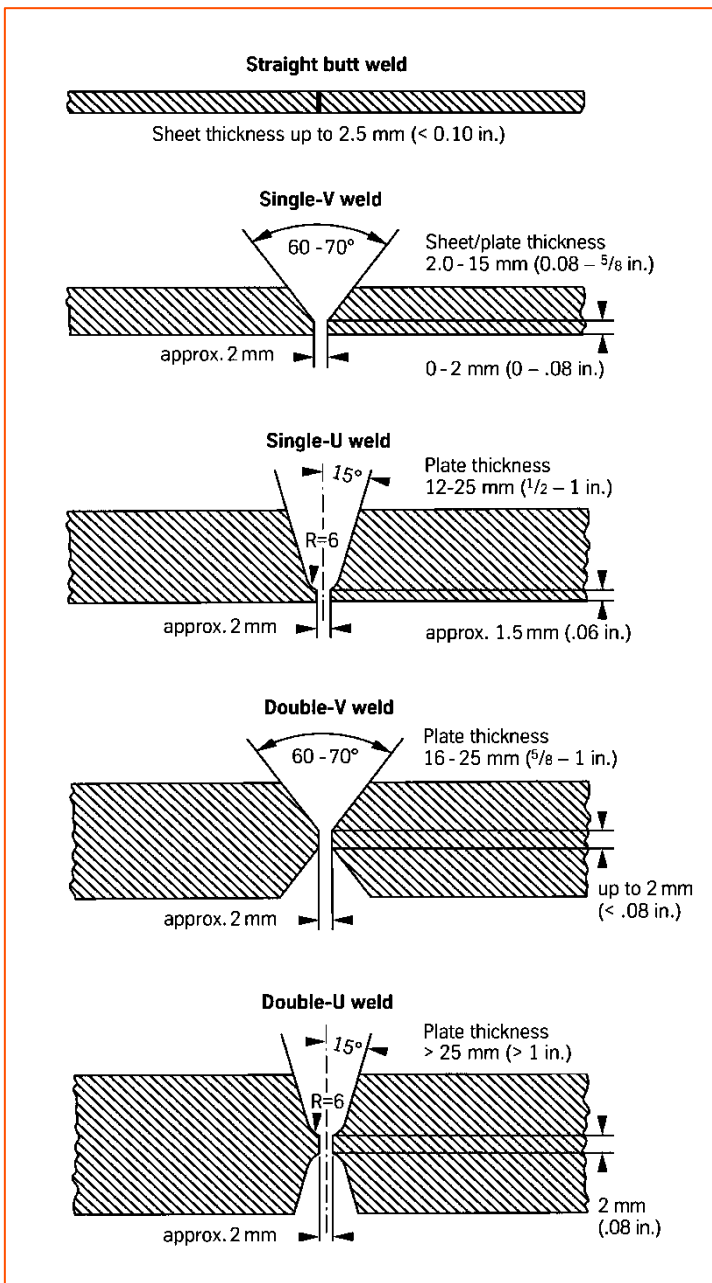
Edge preparation for welding nickel alloys and special stainless steels
